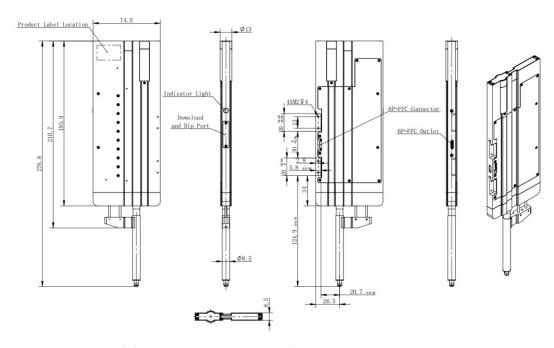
model A of SP13 Dimensional Drawings & Mounting Specifications
